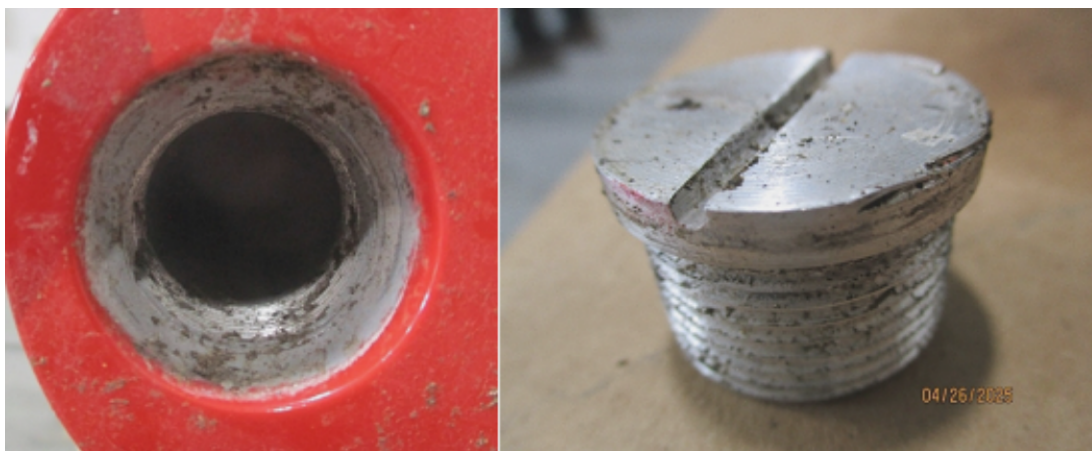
Left elevator counterweight installation hole (left) and recovered counterweight plug (right). Gouging and paint transfer are visible on the counterweight plug.
